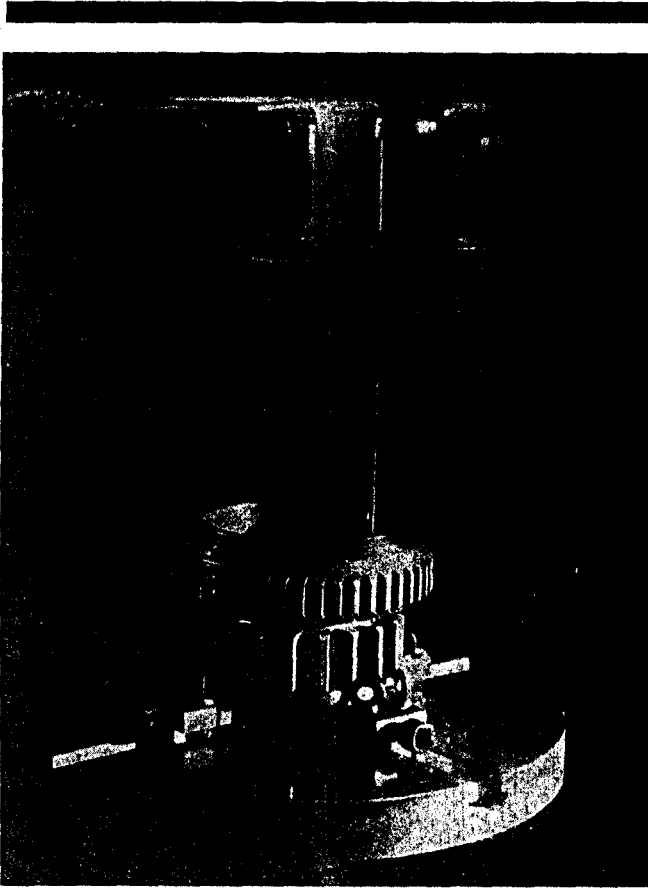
Electron Beam Welding a Gear in Medium Vacuum
